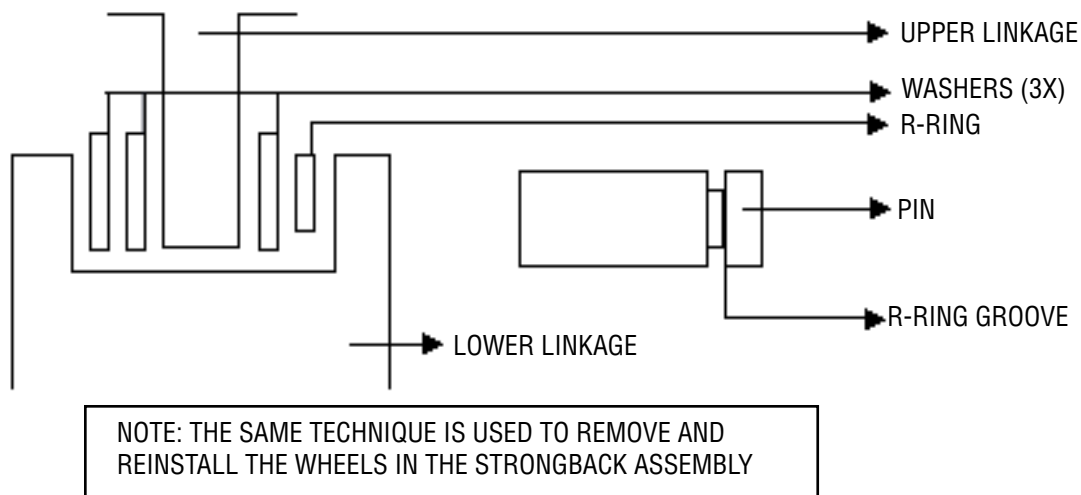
PIN, WASHERS AND R-RING REMOVAL DRAWING
